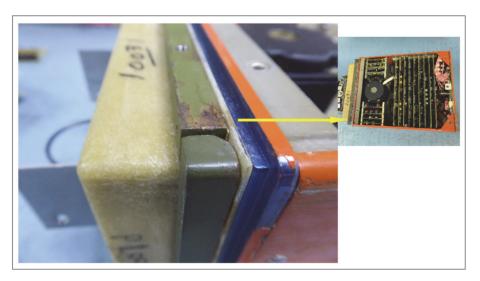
Corrosion on FDR chassis adjacent to electronics assembly
